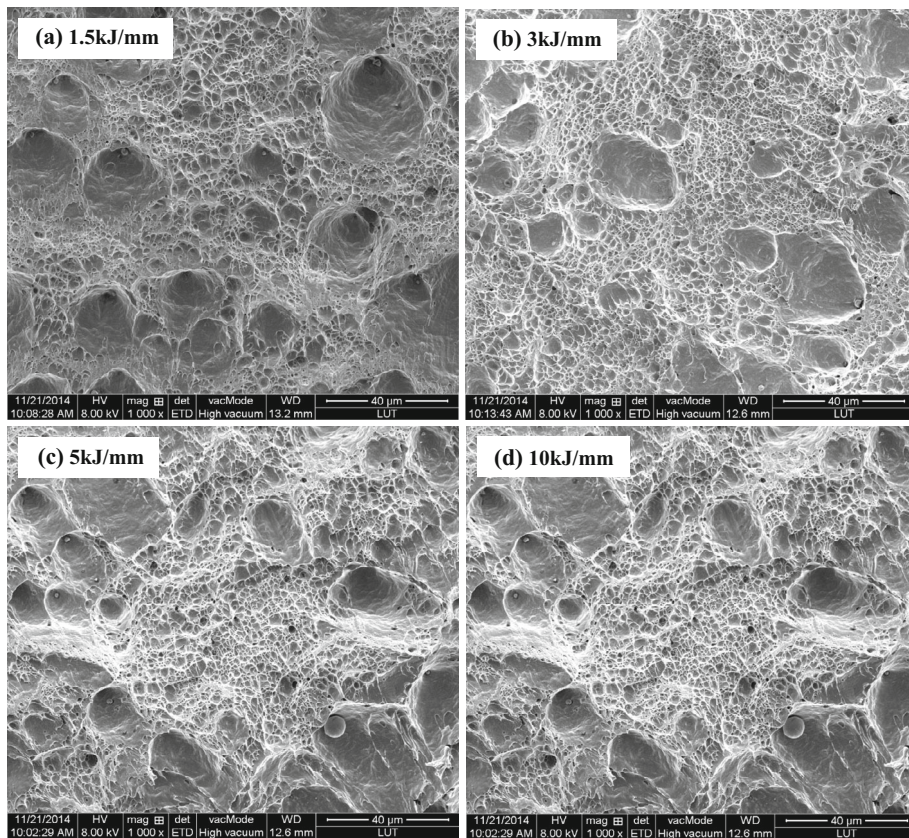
Fracture surfaces of simulated Charpy V specimens with welding heat input of (a) 1.5 kJ/mm, (b) 3 kJ/mm, (c) 5 kJ/mm, and (d) 10 kJ/mm fractured at room temperature [293 K (20 °C)].
